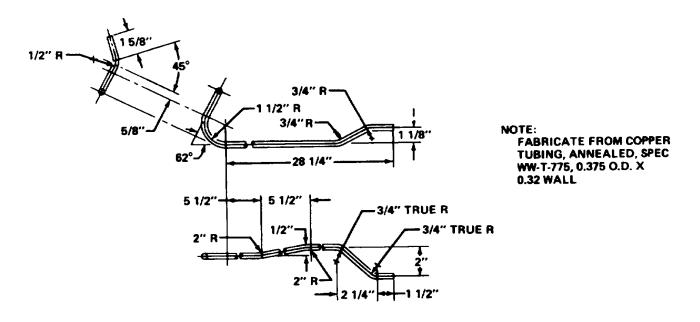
Tube, Airhose Elbow to Air Filter, Right.
